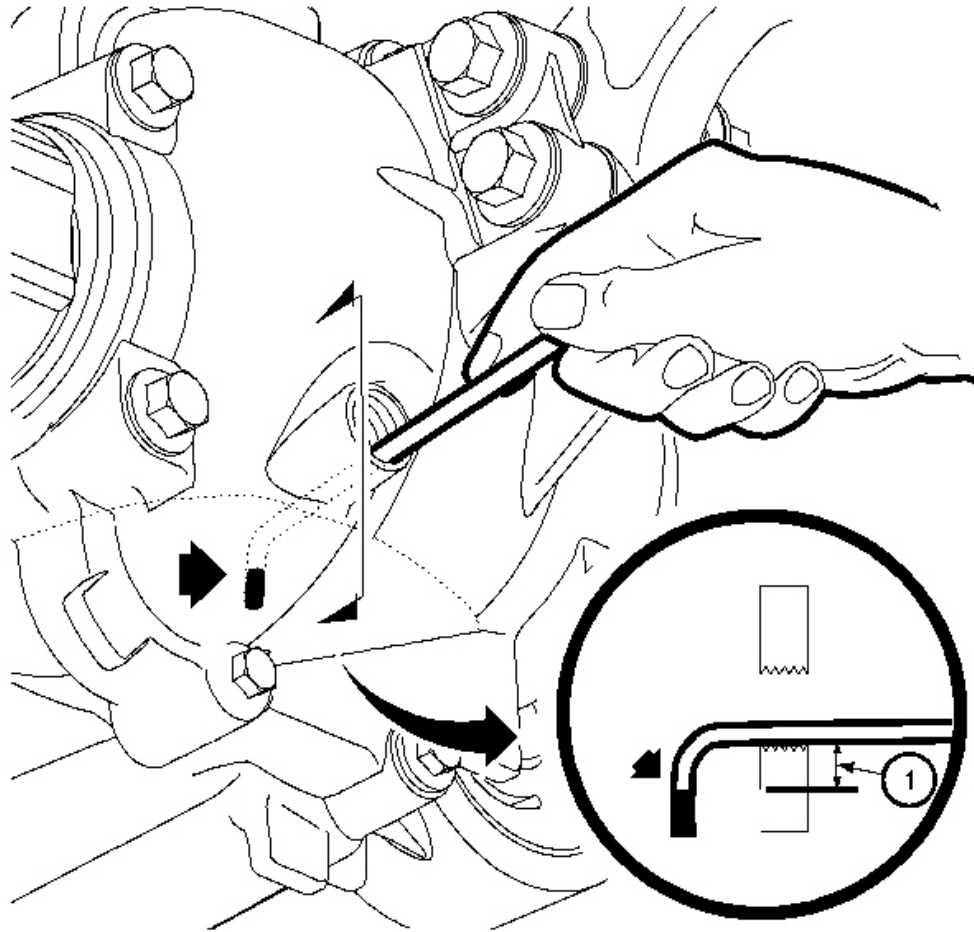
Removing Wire & Measure The Distance Between The Bend & The Fluid Level
